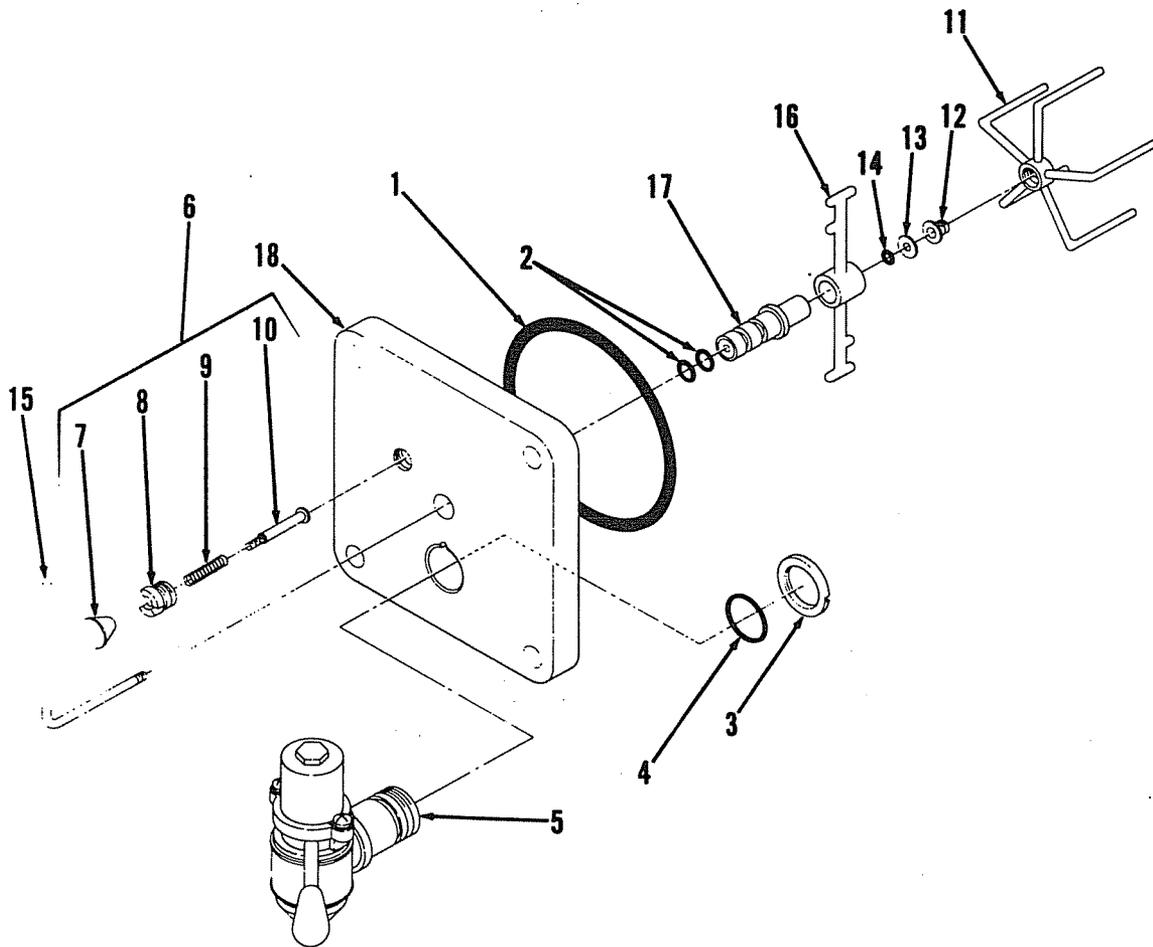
FREEZE CYLINDER FACEPLATE ASSEMBLY
